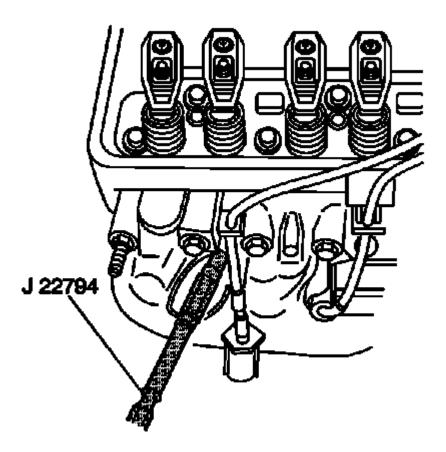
View Of J 22794 Installed Into Spark Plug Hole Courtesy of GENERAL MOTORS CORP.
